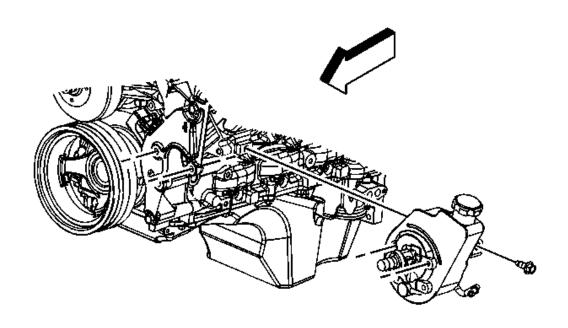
View Of Power Steering Pump-To-Engine Block Bolt Courtesy of GENERAL MOTORS CORP.
